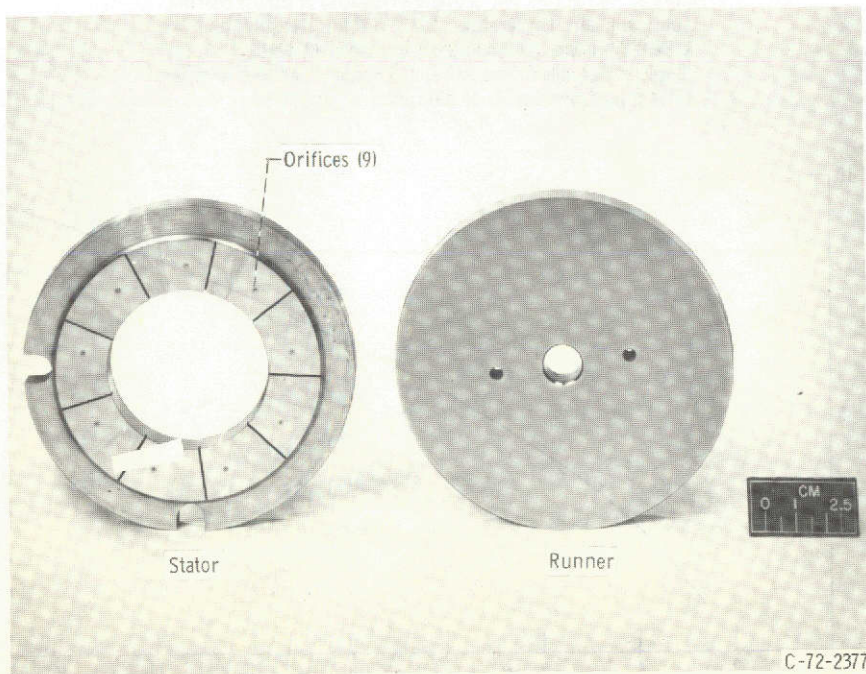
Rayleigh step thrust bearing stator and mating runner.
